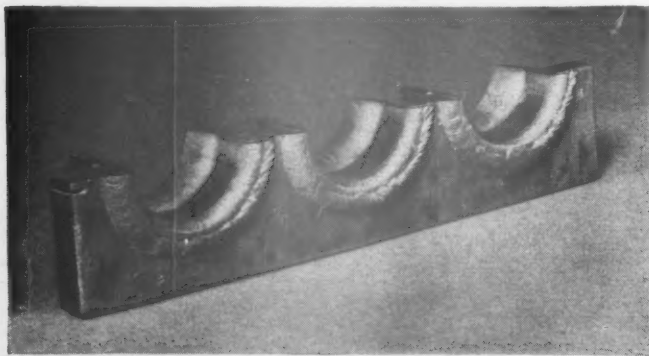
Section of flue sheet in which the tubes have been welded with both bare and coated electrodes
